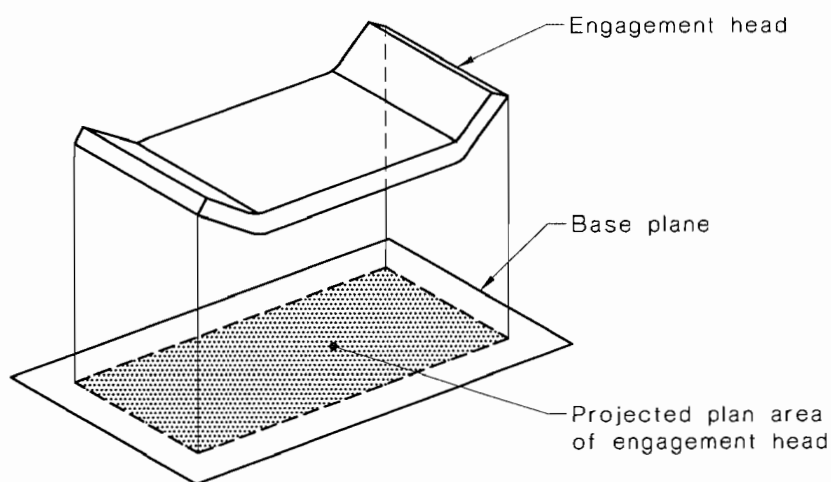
PROJECTED PLAN AREA OF TYPICAL ENGAGEMENT HEAD
